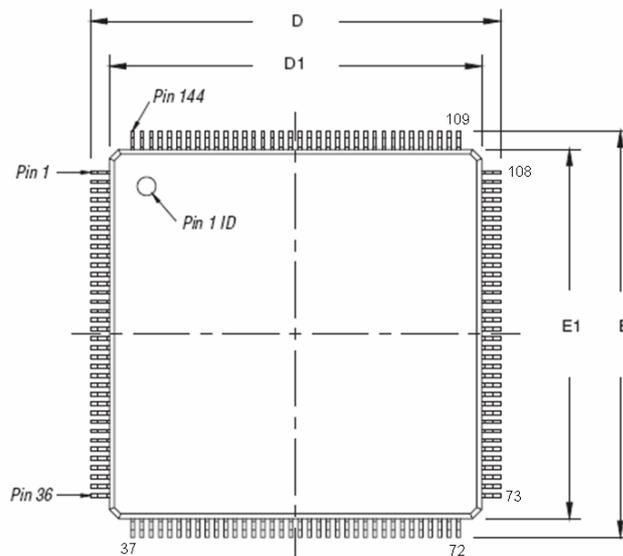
PASA package outline (TQFP 144). The dimensions are: $D=E=22\text{mm}$ and $D1 = E1 = 20\text{mm}$.
